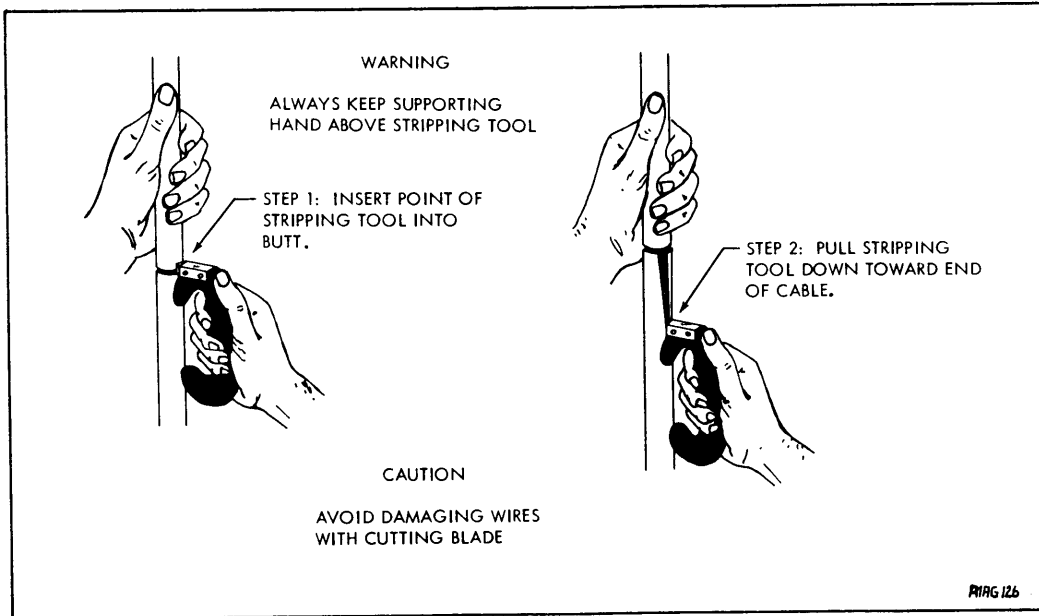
Use of W. E. Co. R62267 Cable Stripper
